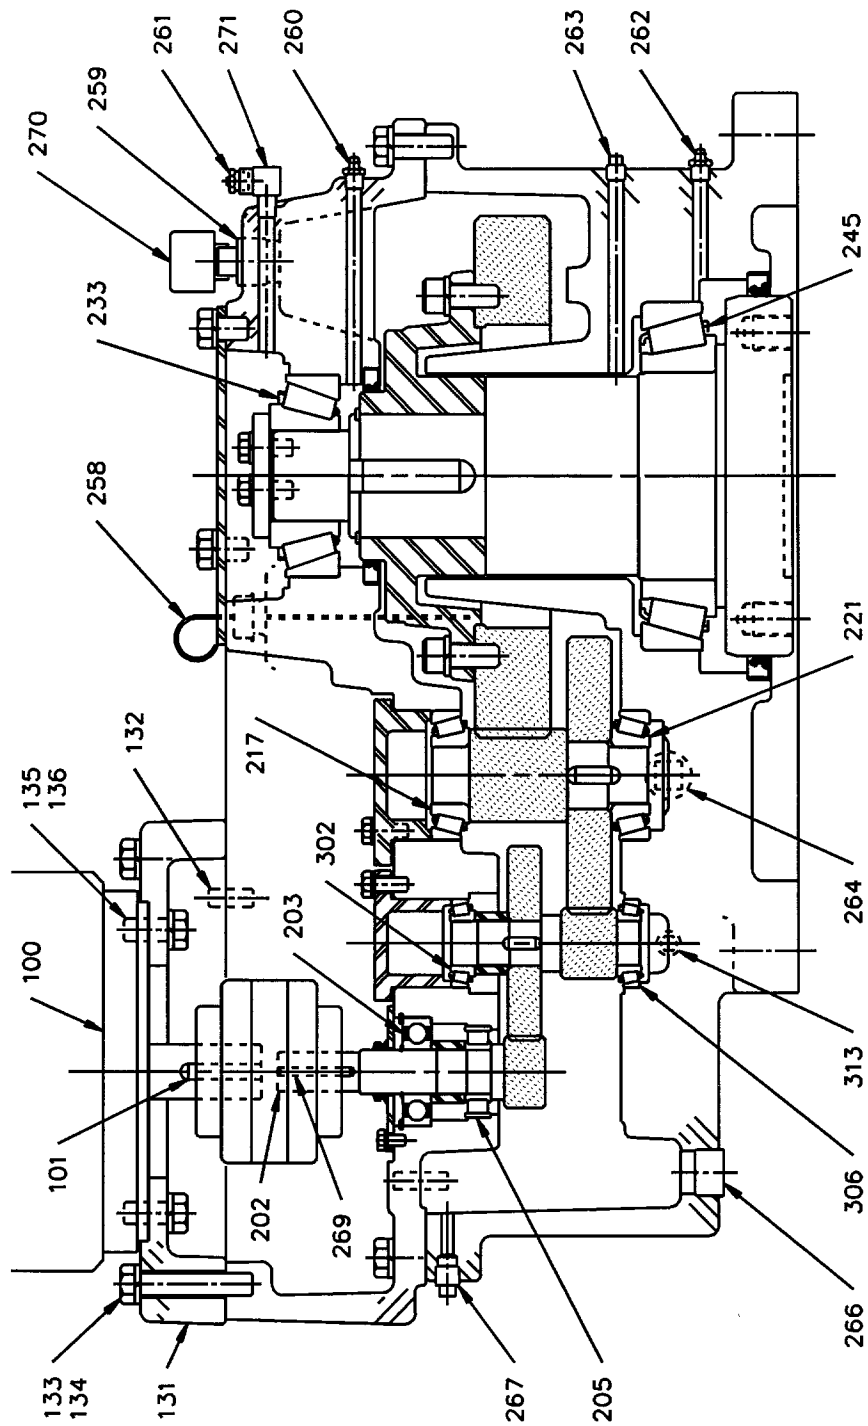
GT Triple Reduction Gear Drive, Size 3,4
